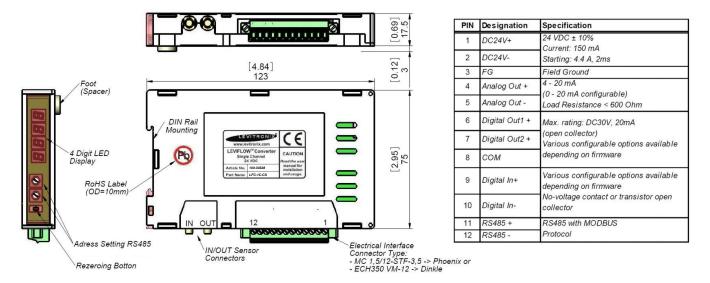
Dimensions and layout of interfaces of single channel converter LFC-1C-CS
